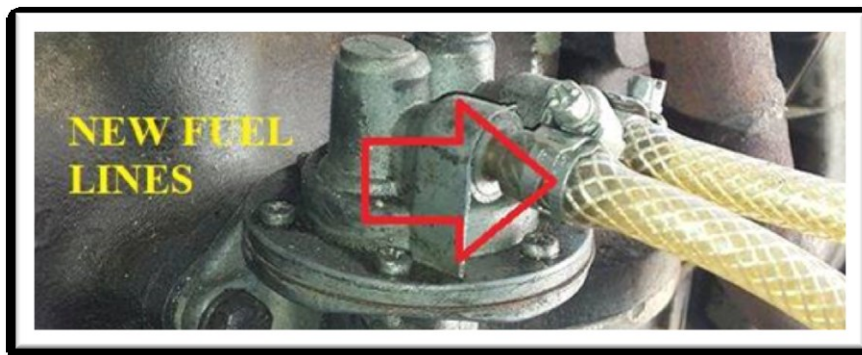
the second hand (new) fuel pump installed on the side of the cylinder block.
